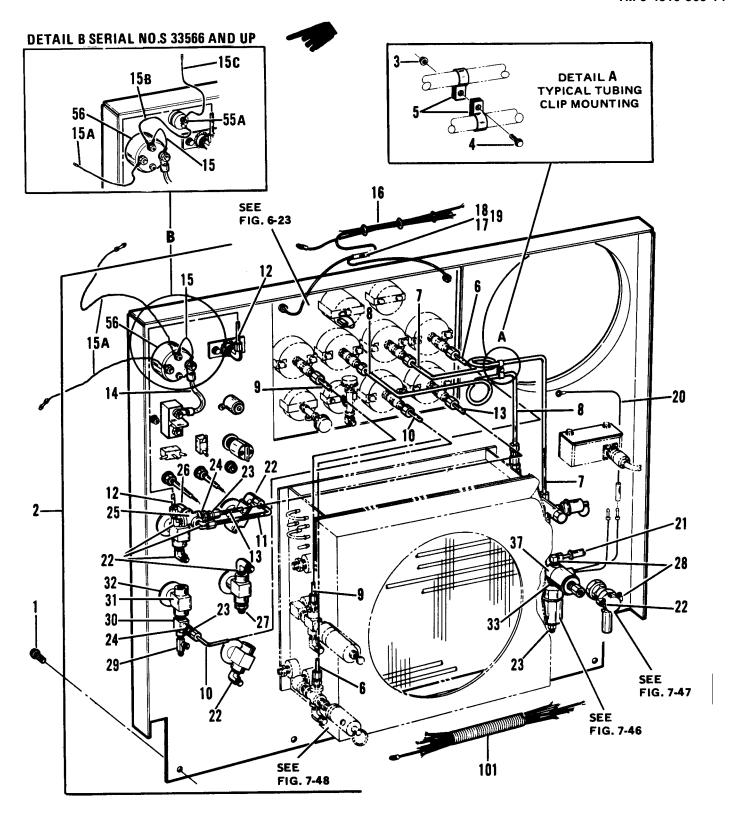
Instrument and control panel assembly (sheet 1 of 2)
